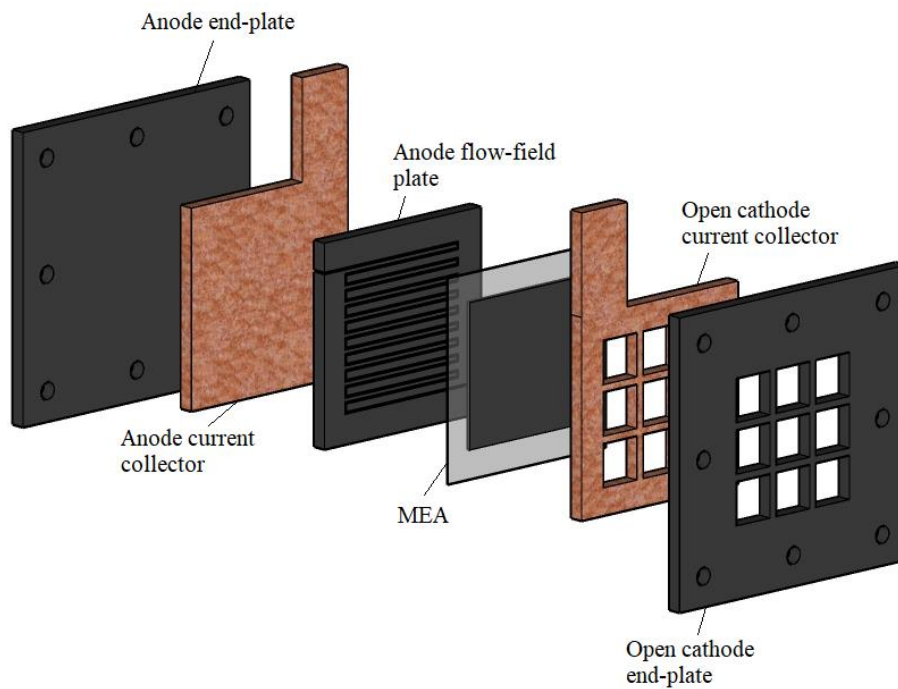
Exploded view of an air-breathing PEFC showing its key components.
